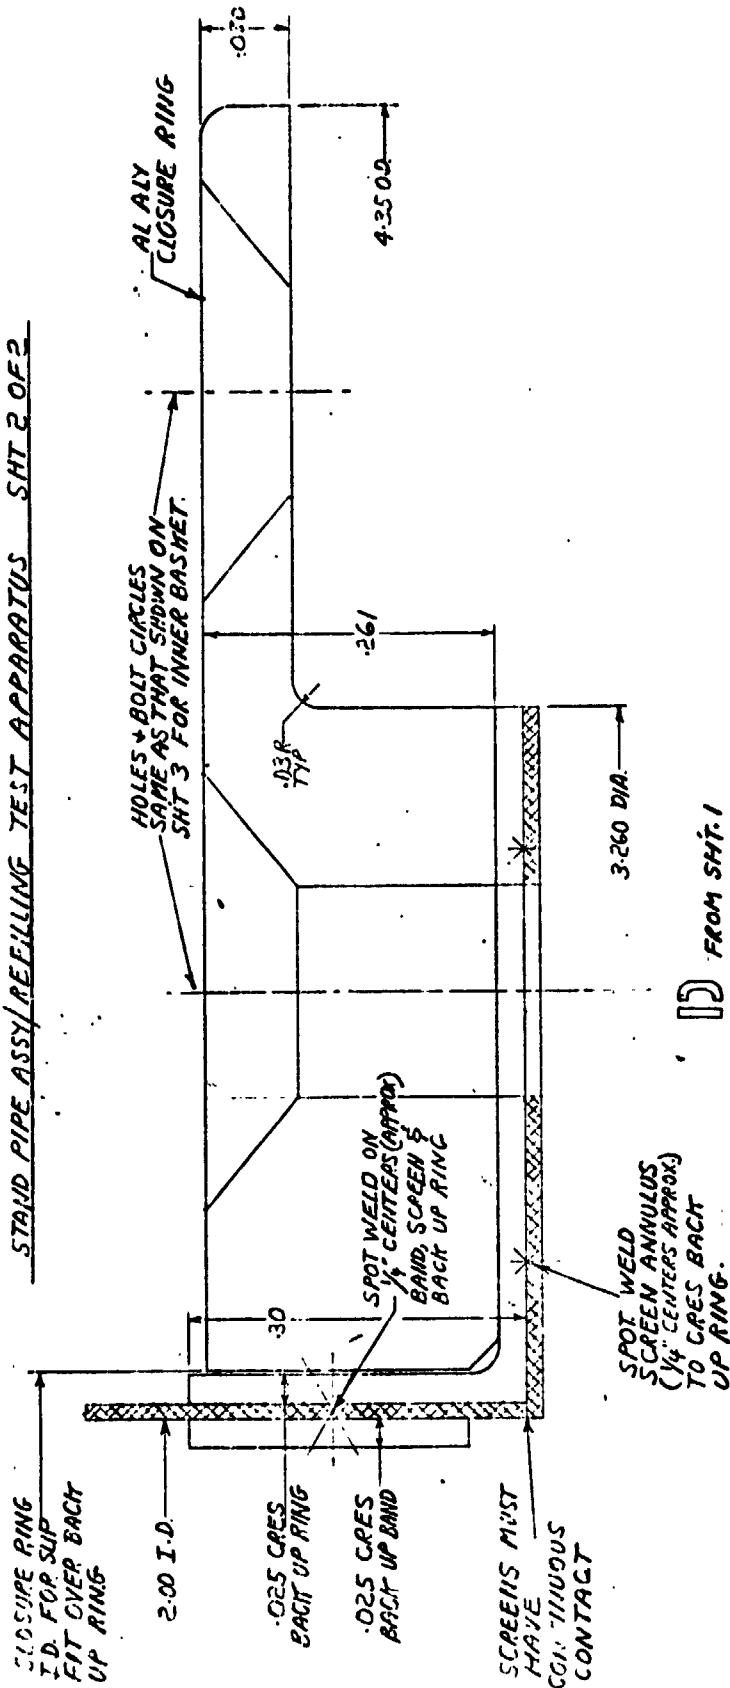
Standpipe Assembly/Refilling Test Apparatus (Sheet 2 of 2)
